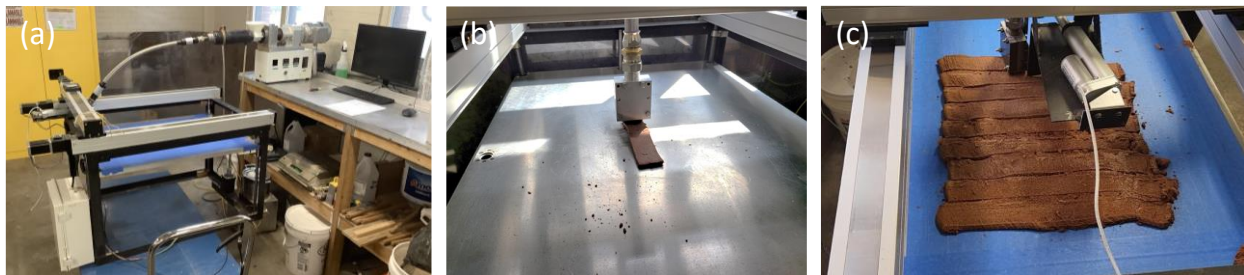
Photographs of (a) 3D-printer, (b) starting a ribbon print, and (c) panel print showing the rotatable nozzle.
